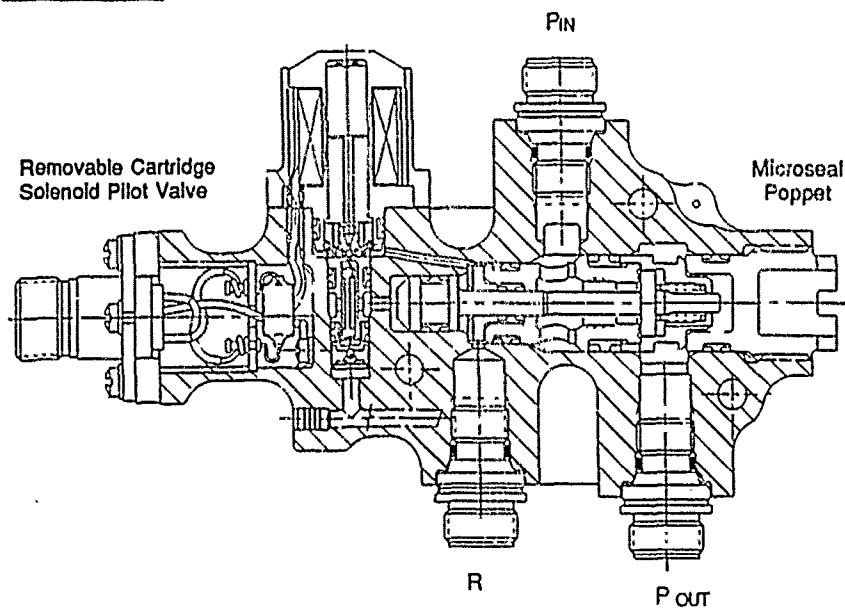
Parker - Selector Valve (3W-2P) Detail Drawing
